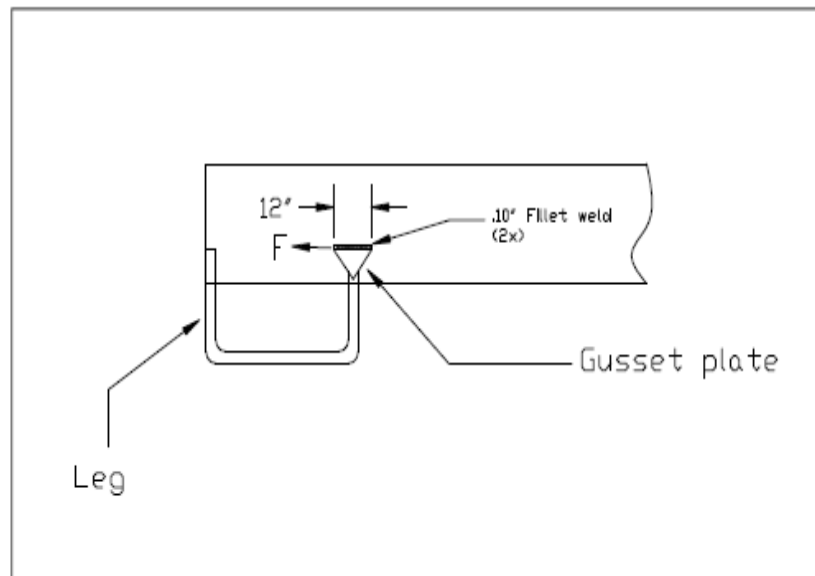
Welding Depiction at Representative Gusset Plate
